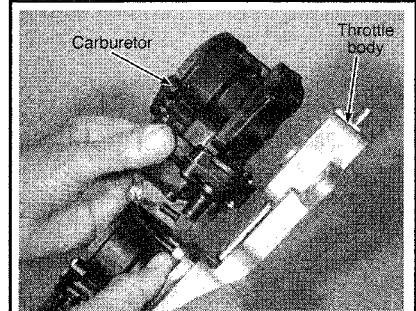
Install the carb to the throttle body, taking care not to disturb the seal
